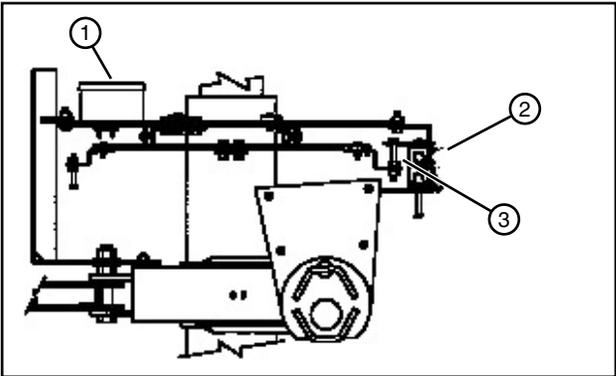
2 Wheel E-Z Tow Pivot Mounted Auto Reverse
